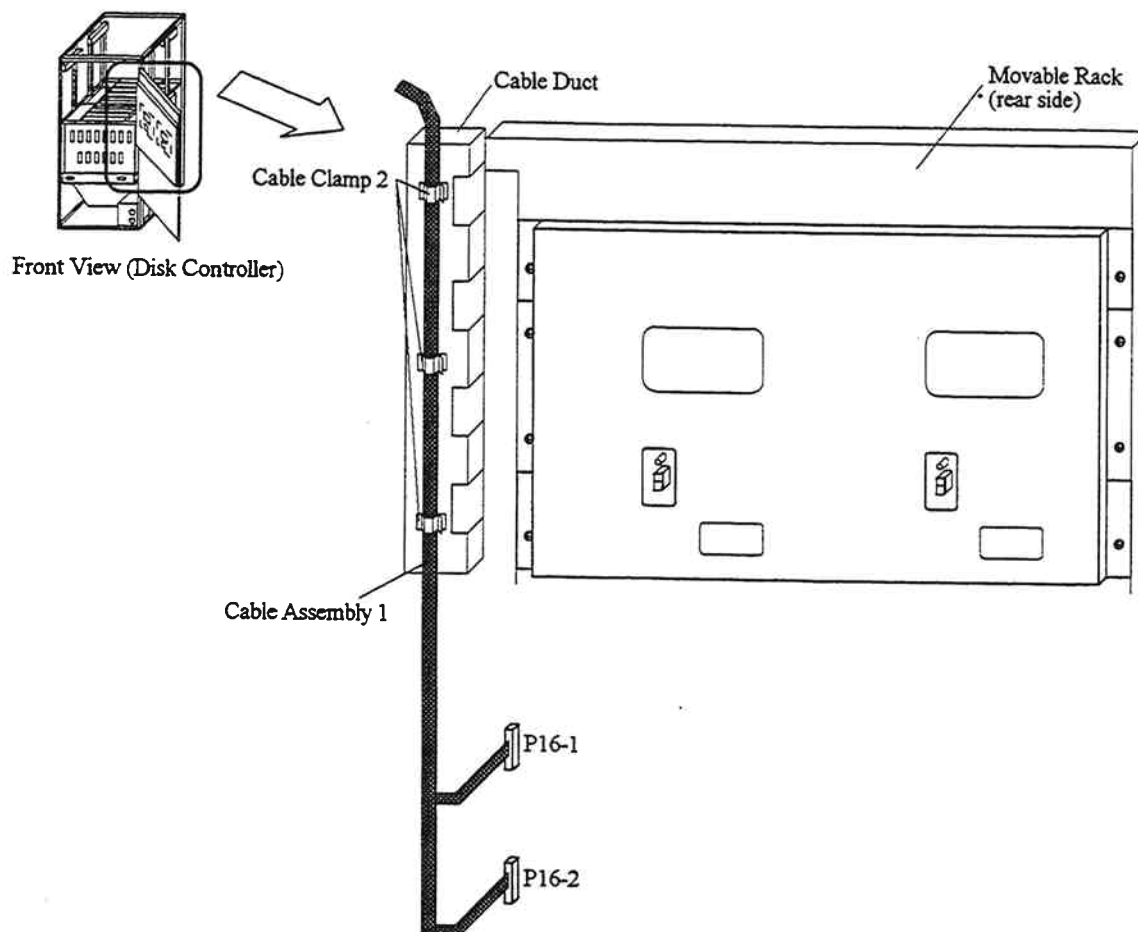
Attachment of the Cable Assembly 1
